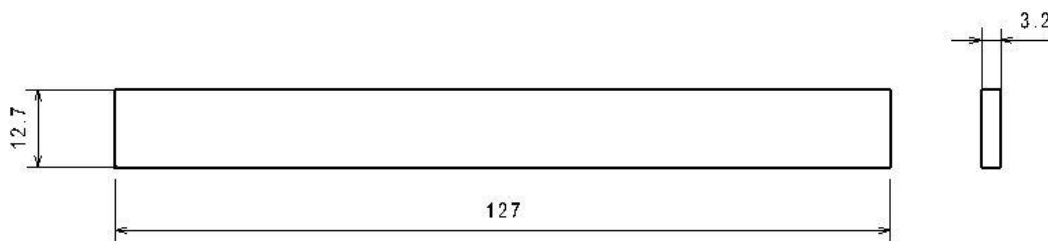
Dimension of flexural specimen based on the ASTM-D790 standard
